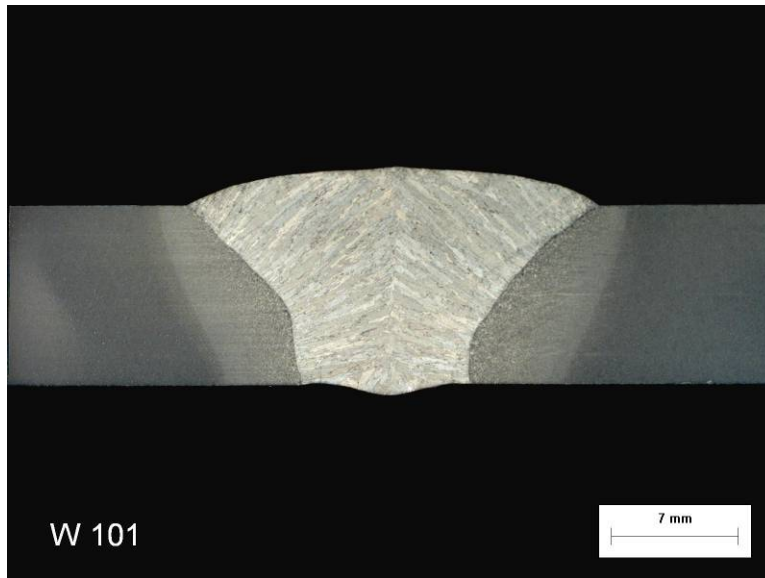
Weld with 10-mm Procedure and 3.0-mm Root Opening
